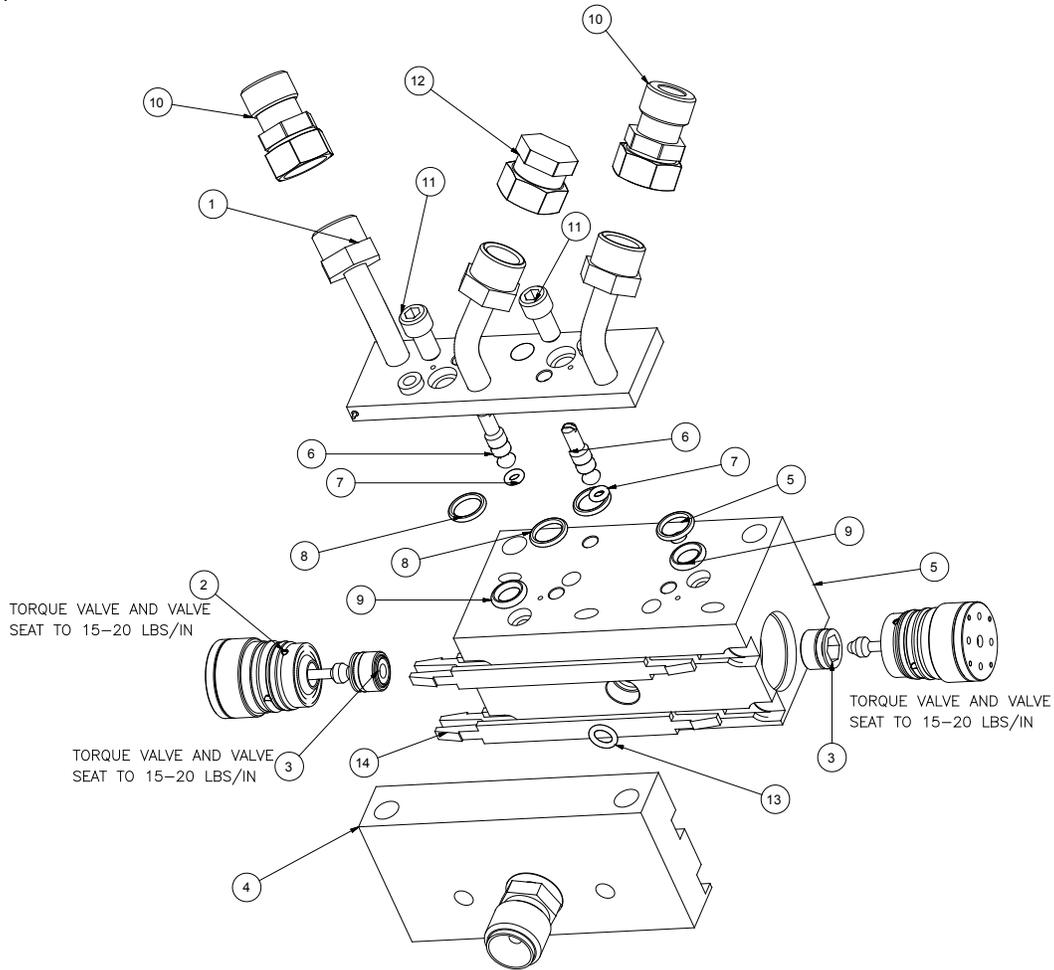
78075-01 & 78075-03 Bell Wash Assemblies
